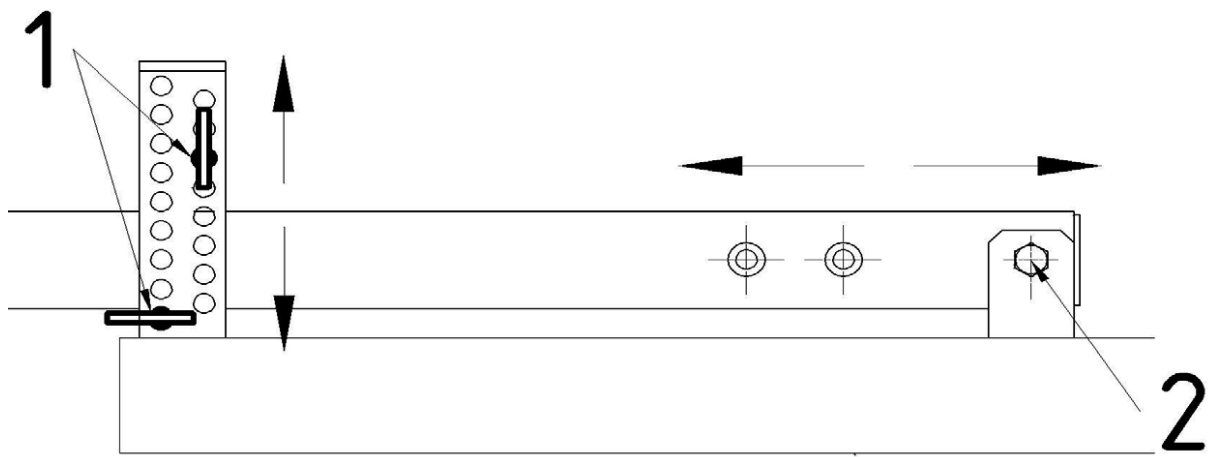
Depth and tubular shaft distance adjustment: 1 – bolts for adjusting the working depth with a stabiliser plate; 2 – screw for fixing the shaft arms.
